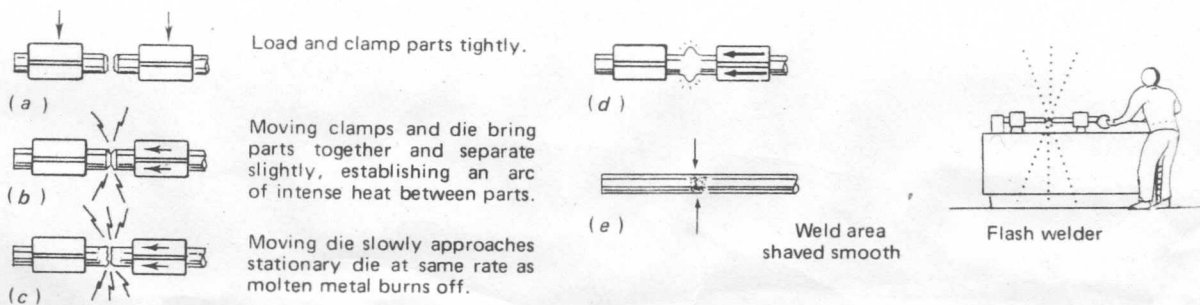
Typical flash-welding operation. (Redrawn from *Resistance Welding, Designing, Tooling and Applications* by W. A. Stanley. Copyright 1950 McGraw-Hill Book Company. Used with permission of McGraw-Hill Book Company.)
